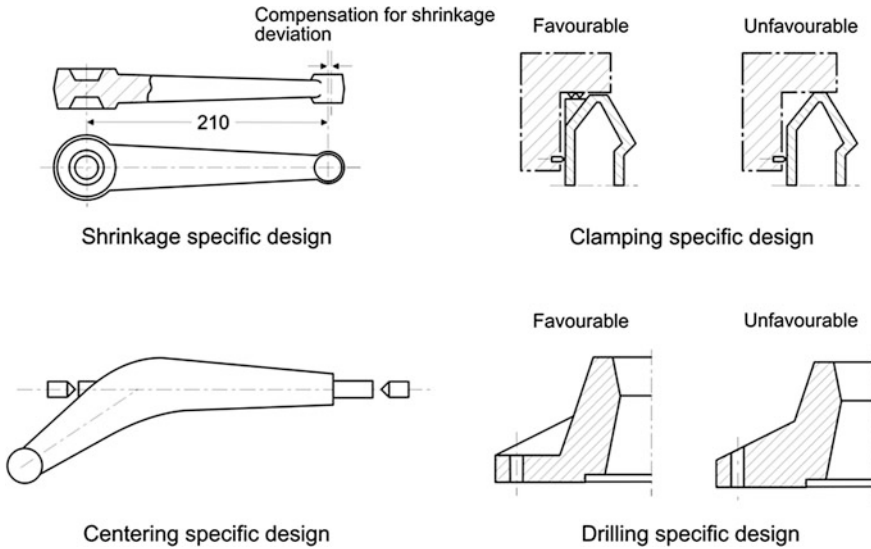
Designs of various closed-die forgings that are machining-compatible
